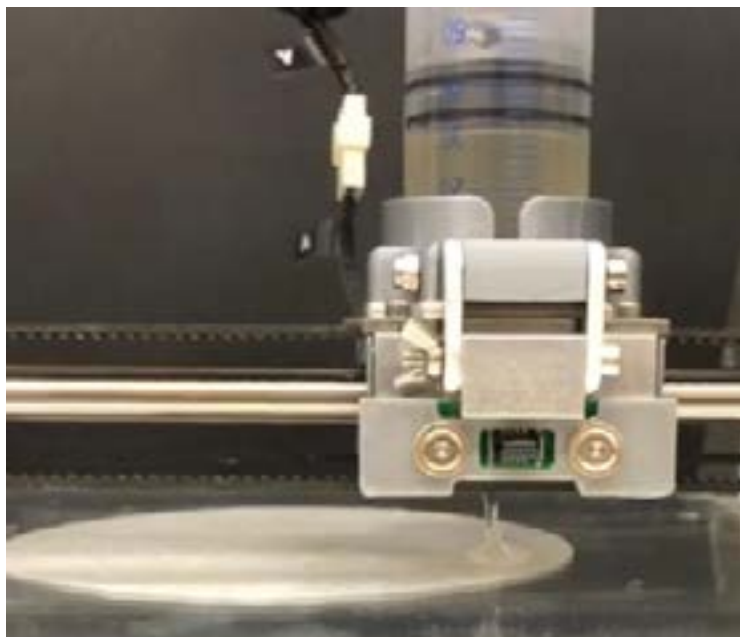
Zmorph 3D printer, type fused deposition modeling initiating the printing.
